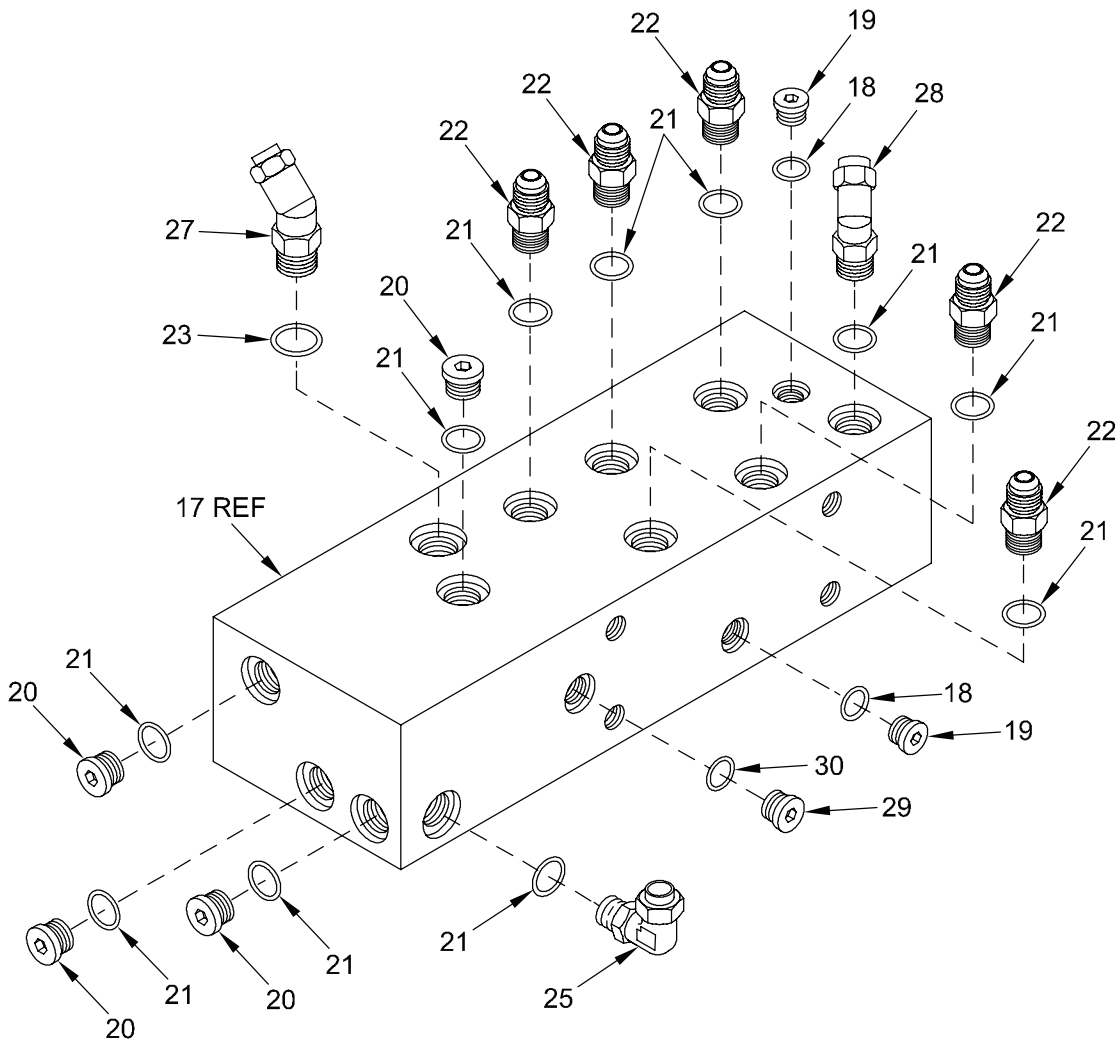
Primary Manifold Assembly (Sheet 2 of 2)
